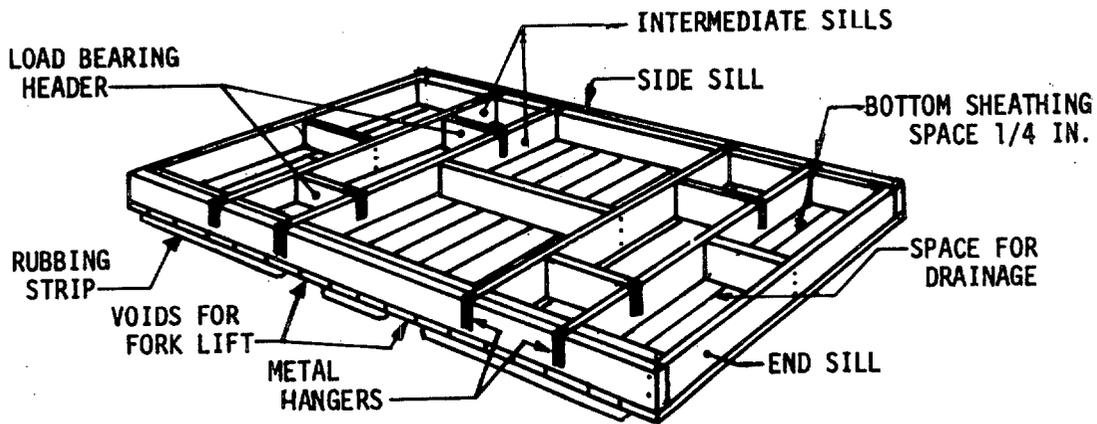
Details of skid-type base (with 2 - inch fork lift flooring).
